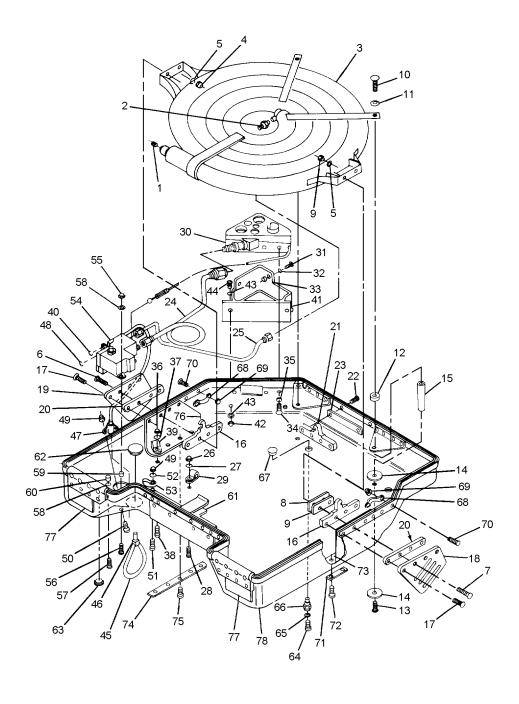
Lower Container Assembly and Handle Assembly (Rocket Jet)
